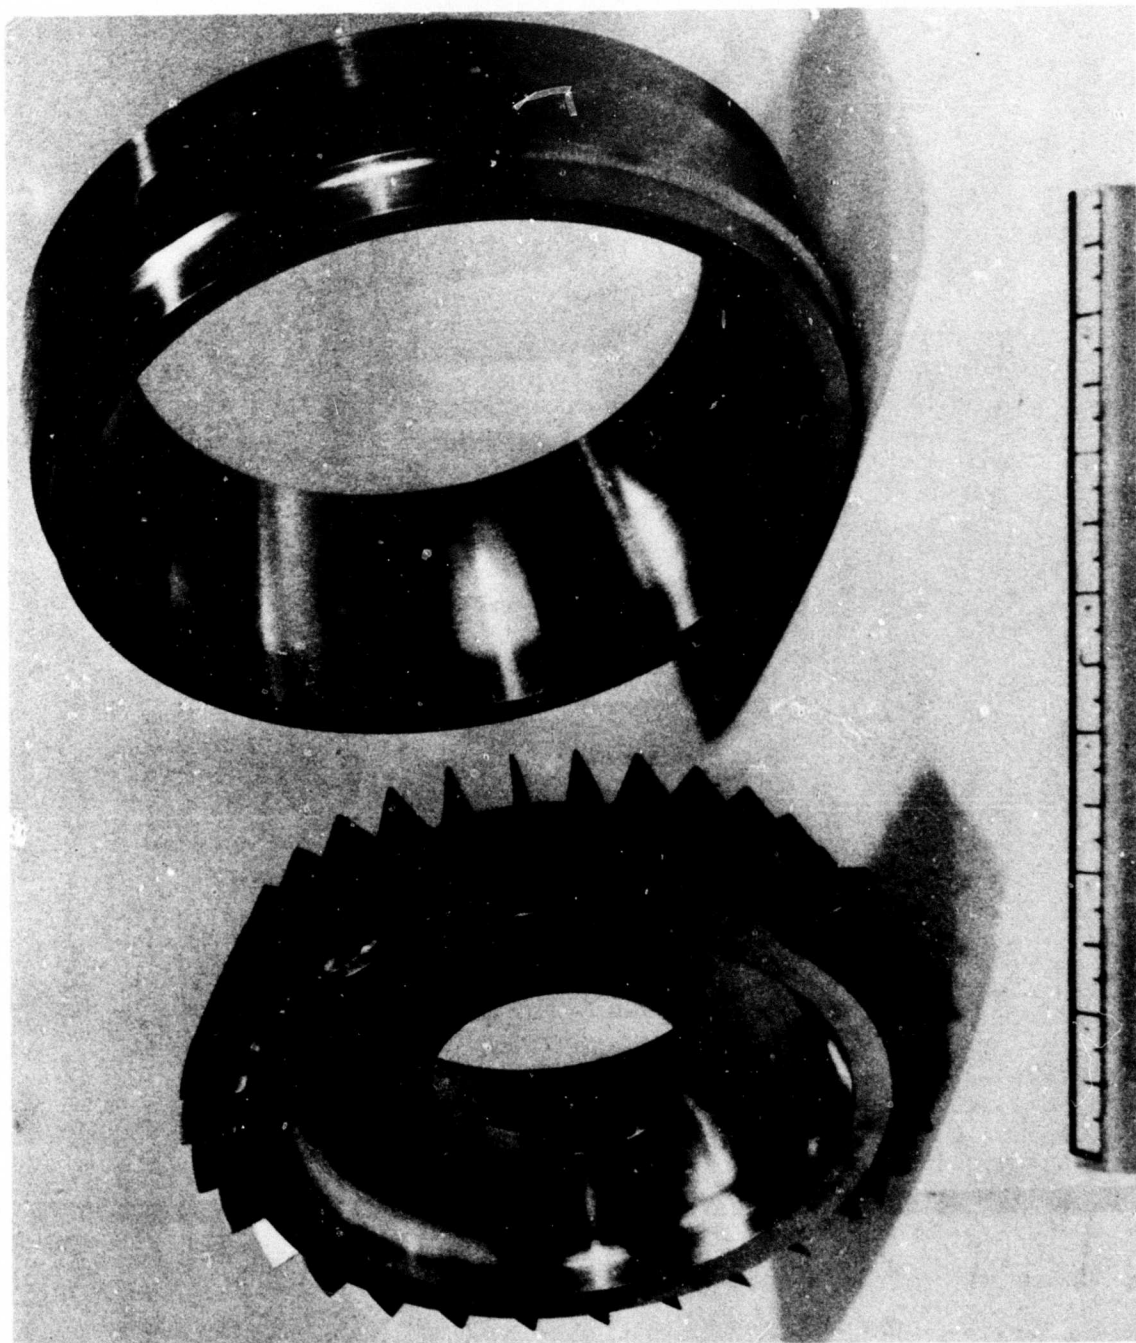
Exit Stator and Interconnecting Duct Assembly - Exploded View
